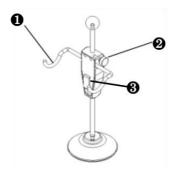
Steering Wheel Holder Stand Tool AUTEL-CSC0500/27
